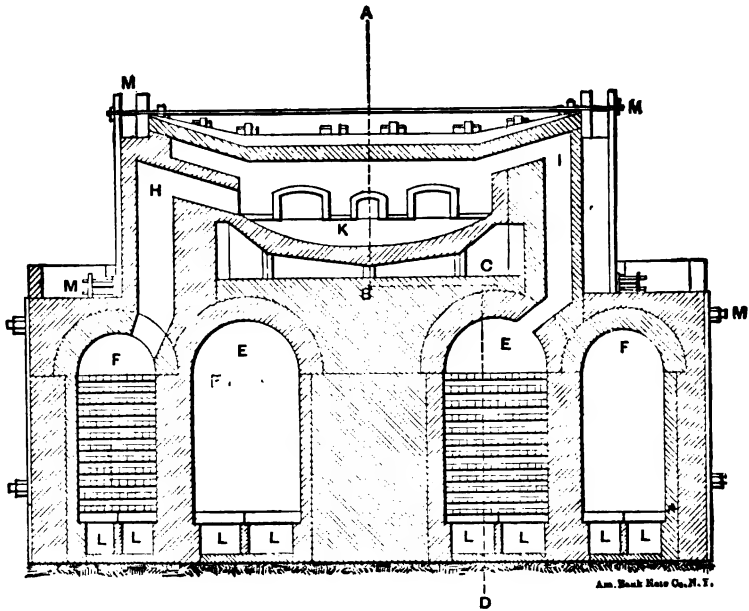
Transverse Section of a Typical Open-hearth Regenerative Gas-furnace..
